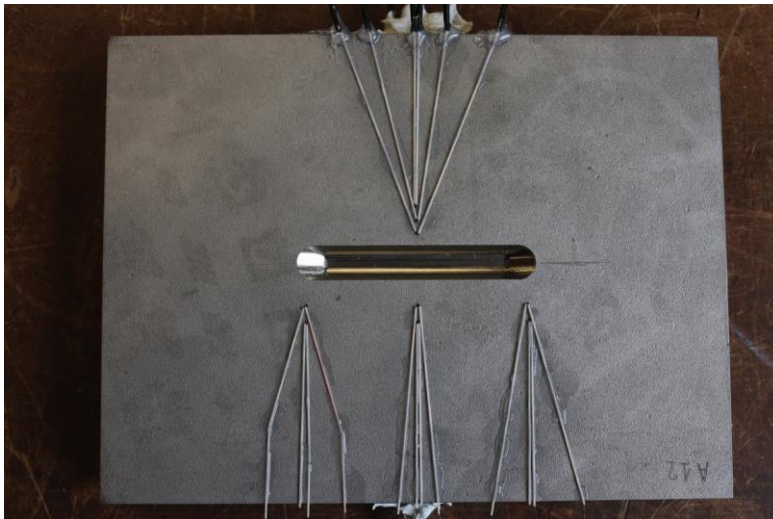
TG6 specimen prior to welding, showing machined slot and top surface thermocouples
